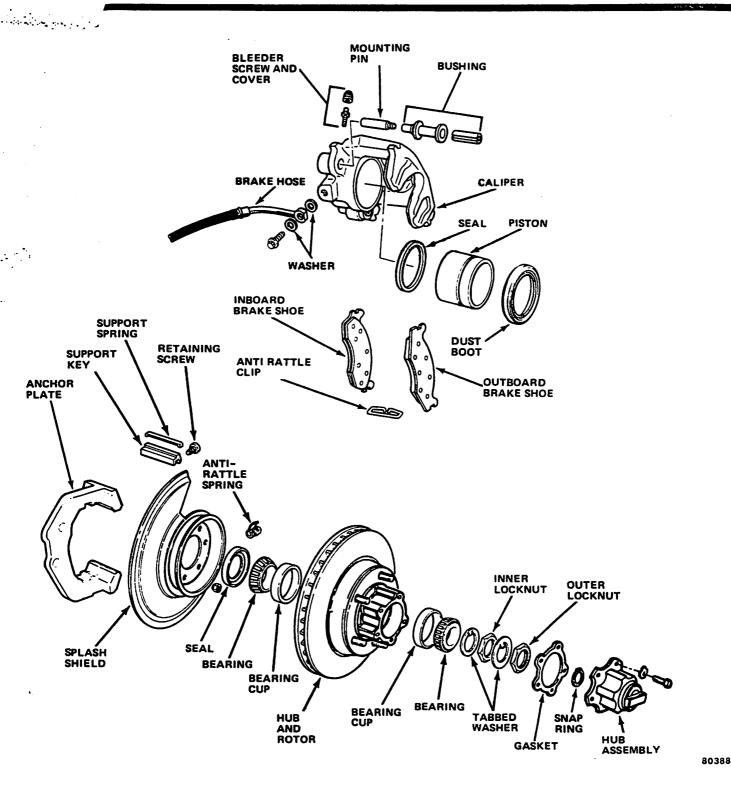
G-30 Disc Brake Assembly-CJ and Scrambler Models
